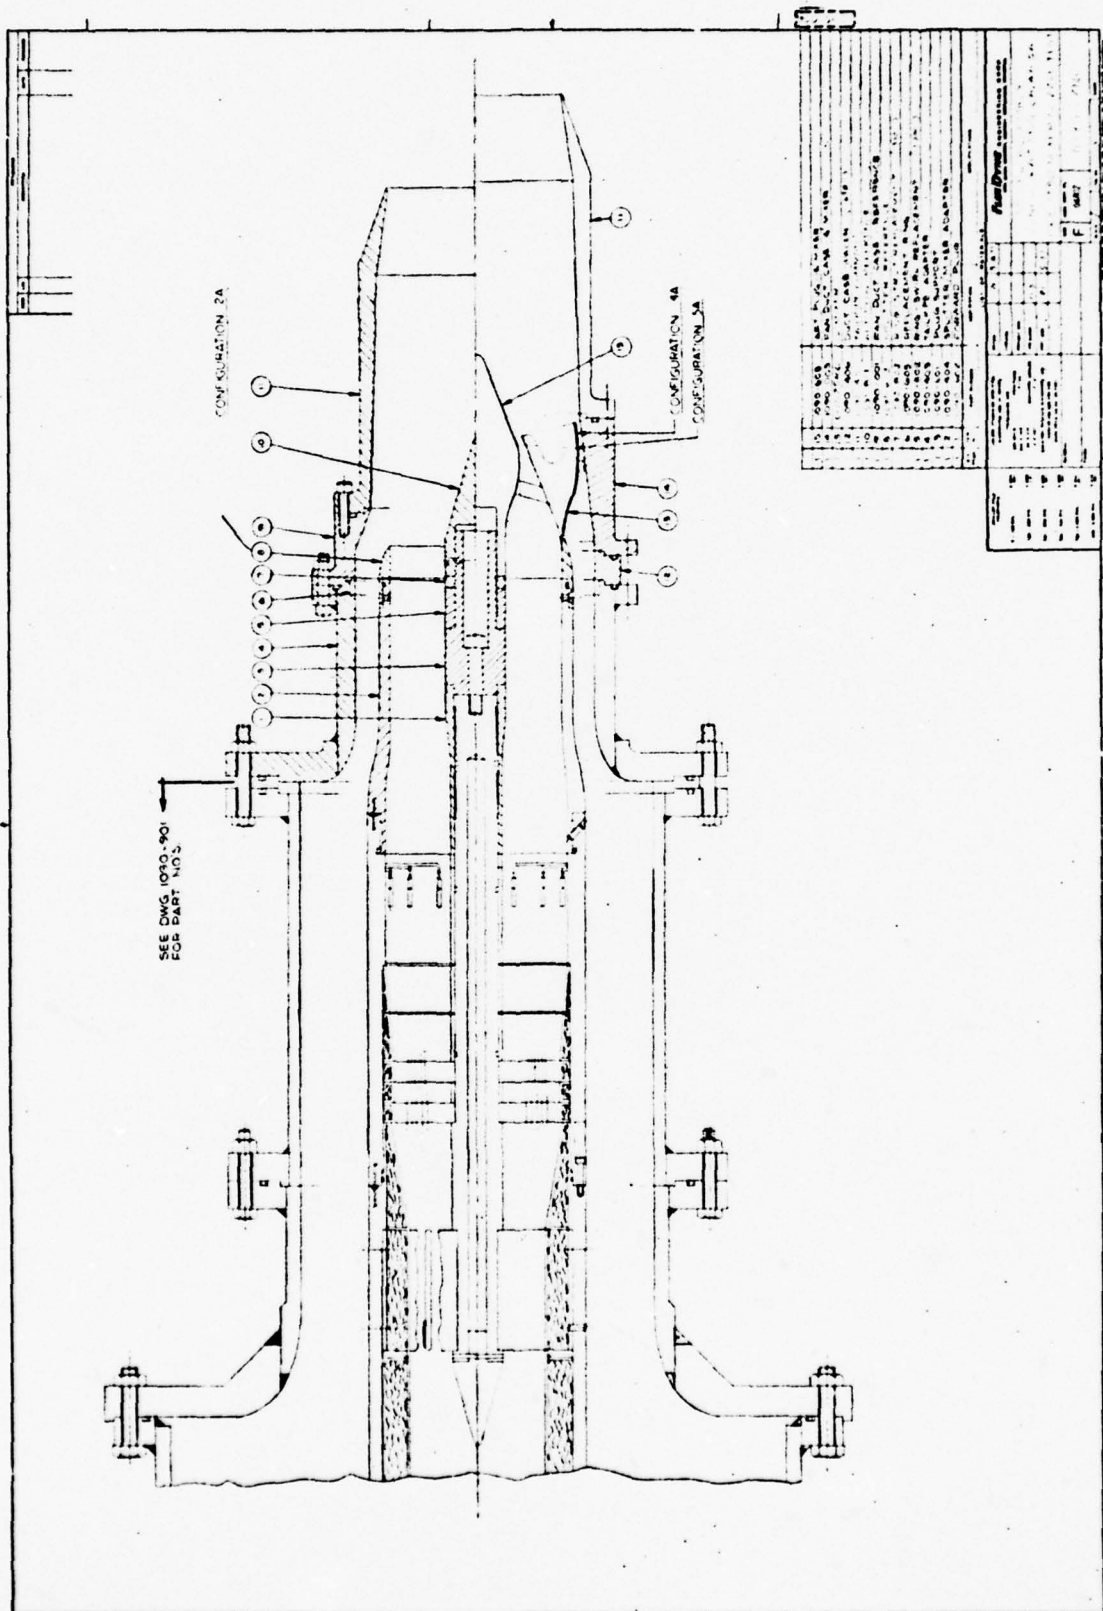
ASME NOZZLE TEST ASSEMBLY DRAWING
